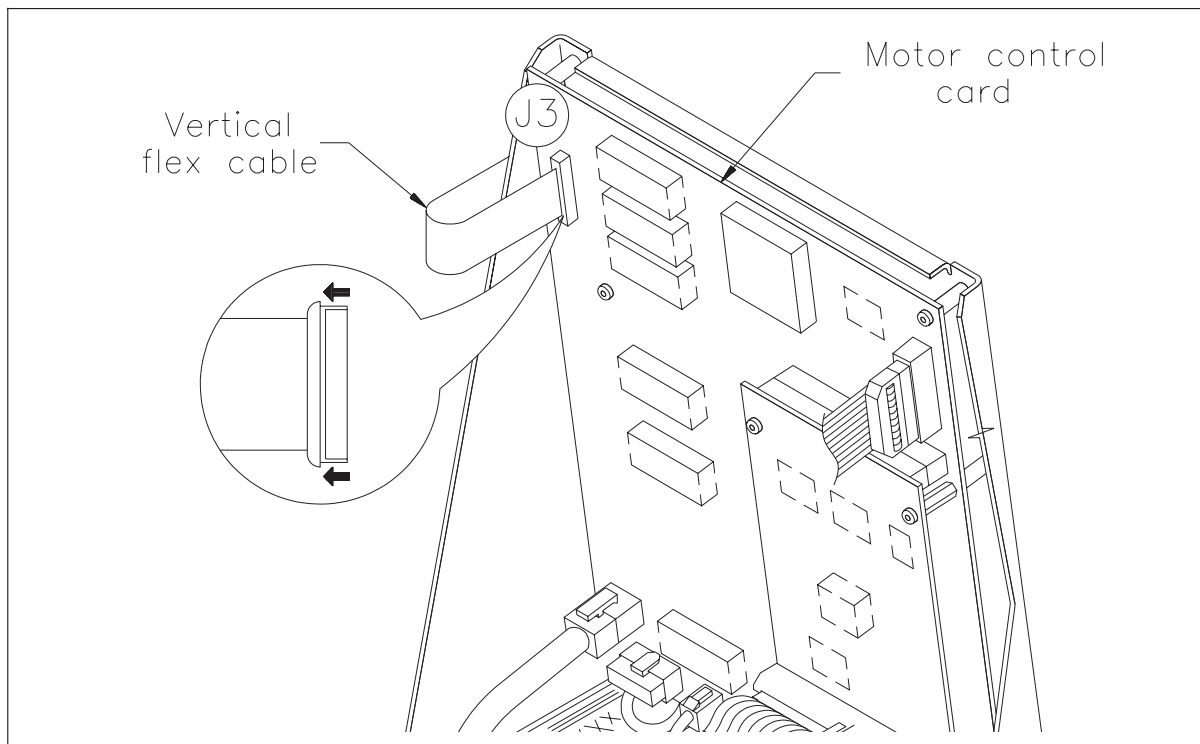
Disconnecting the vertical flex cable from the motor control card
